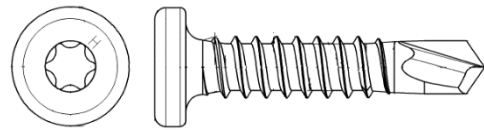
TORX PANCAKE HEAD (TPCH) SD FRAMER SELF-DRILLING SCREW
